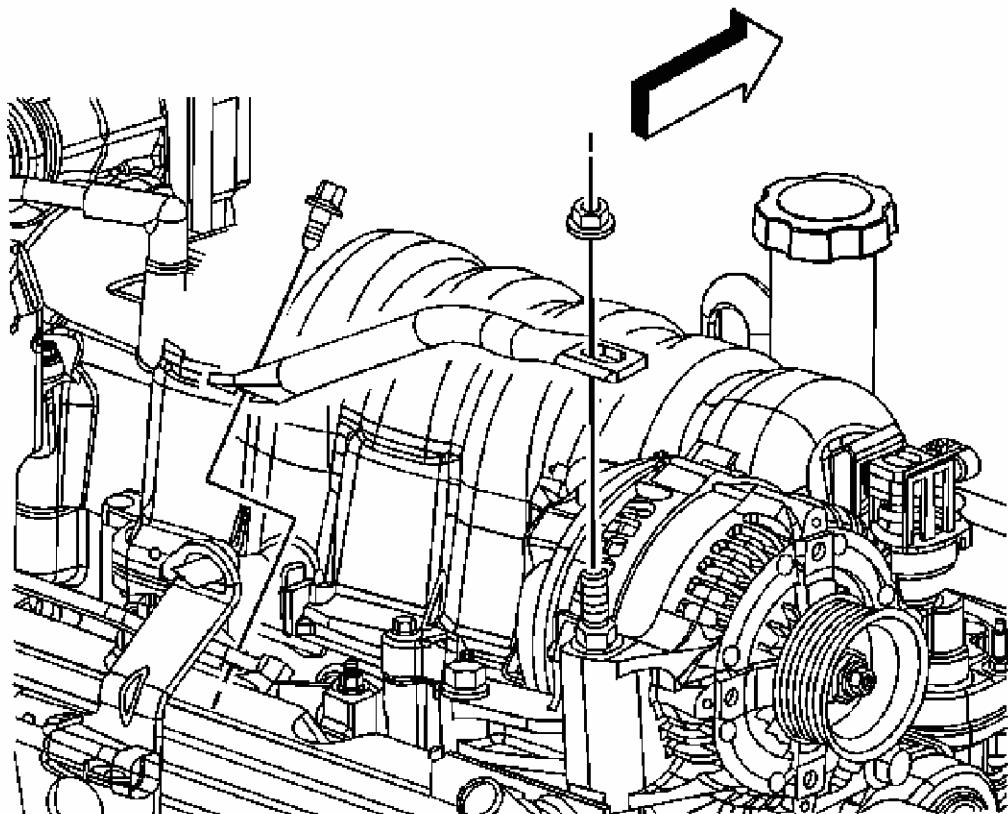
Removing/Installing Generator Brace Bolt & Nut
